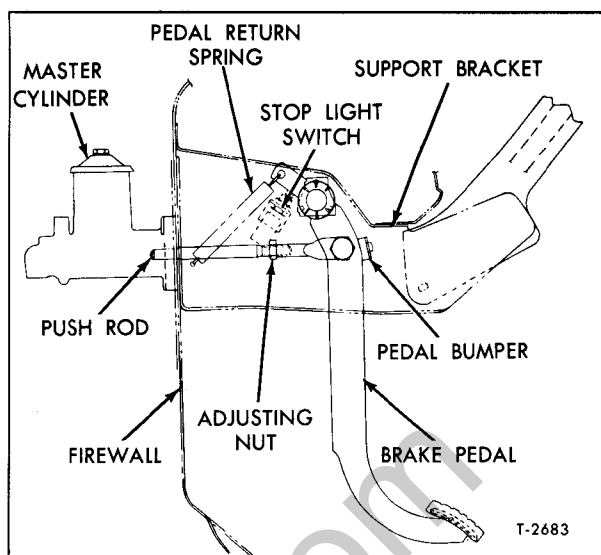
Brake Pedal and Master Cylinder Installation (Conventional Cab Models)
